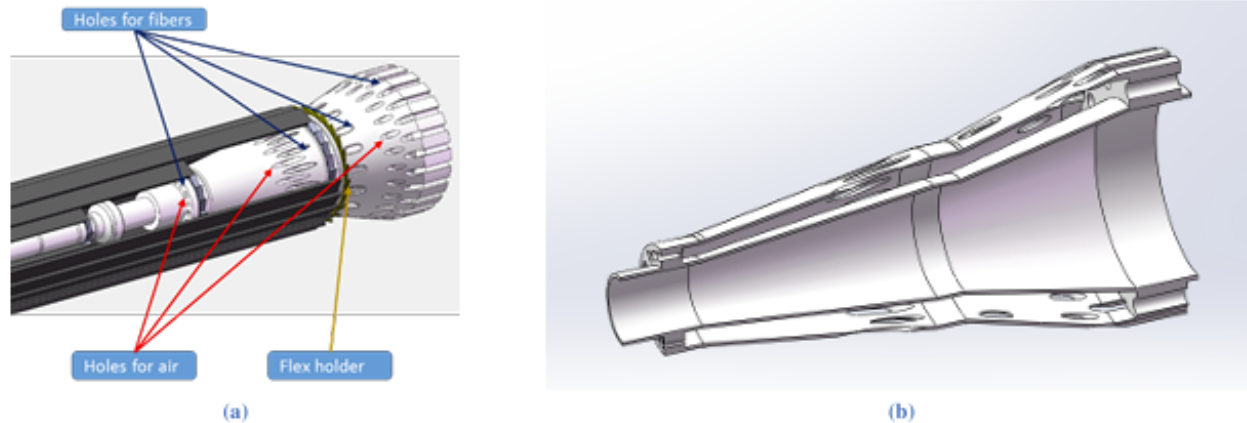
Ventilation and cable/fiber routing channels within the conical support structure.
